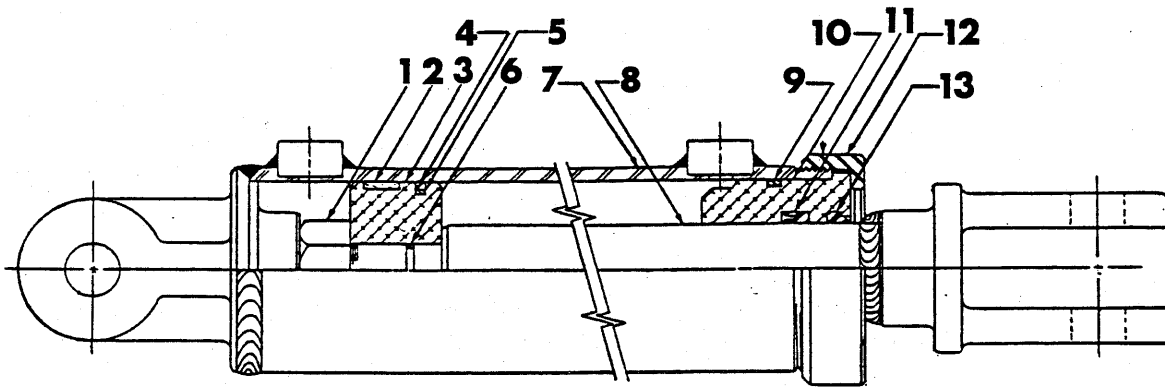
STEERING ASSEMBLY (ALL MODELS)
